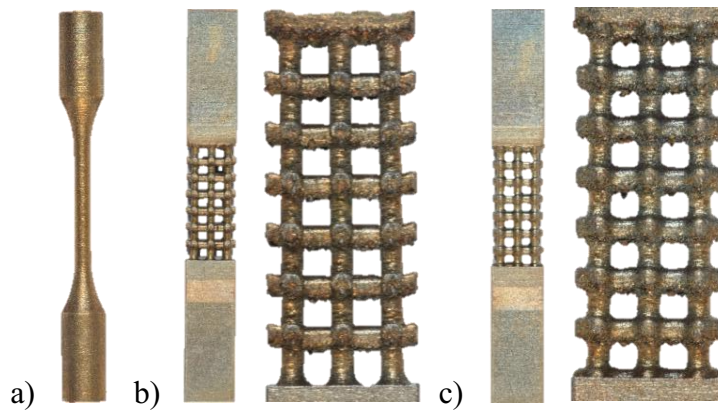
Printed samples: a) BC, b) CY, c) CC.
